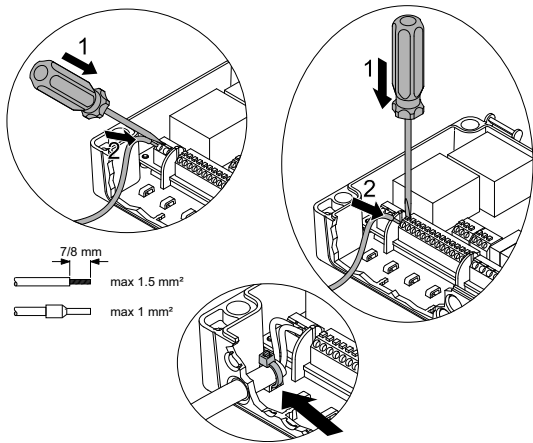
Connecting the cables. Screw driver 0.6 x 3.5.
